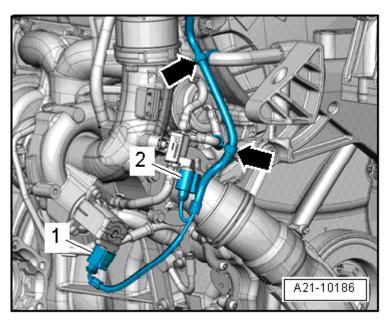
Identifying Turbocharger Electrical Connectors Courtesy of VOLKSWAGEN UNITED STATES, INC.
